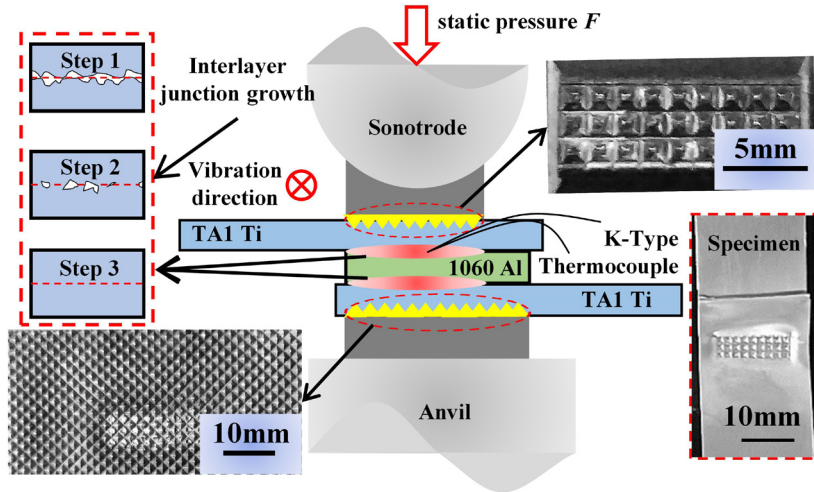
Schematic diagram of the ultrasonic welding process and the appearance of a welded specimen.
